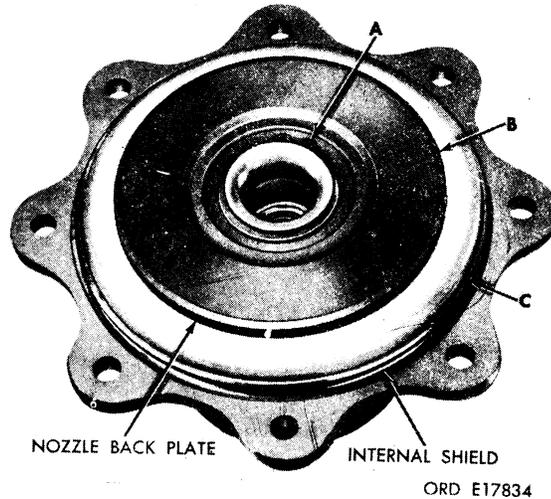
REMOVING OR INSTALLING RETAINING RING, NOZZLE BACK PLATE, AND INTERNAL SHIELD - TURBOCHARGERS 7748900 AND 10935279.
